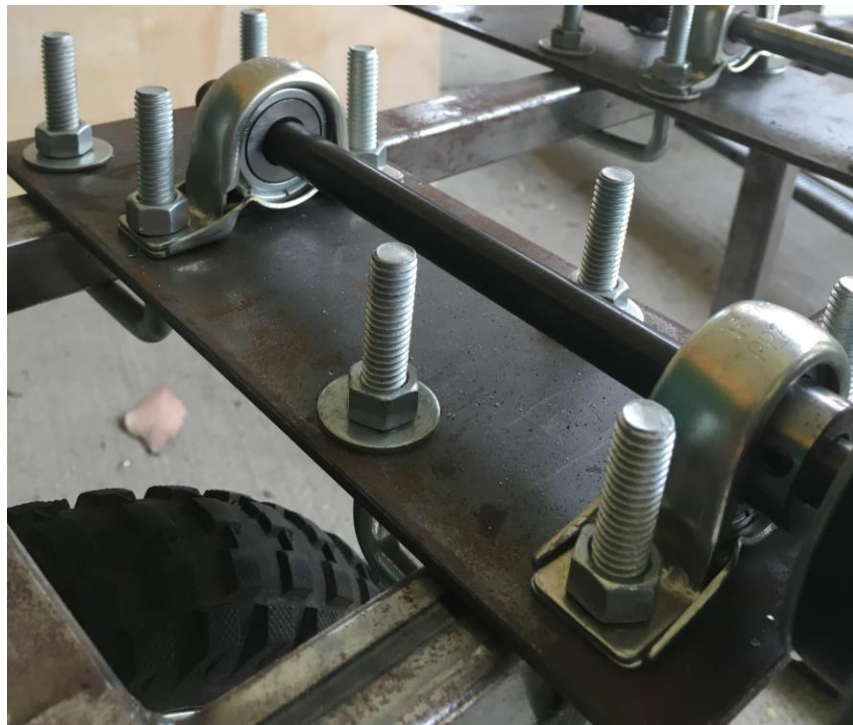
A photo of the completed intermediate adjustable shaft assembly.
